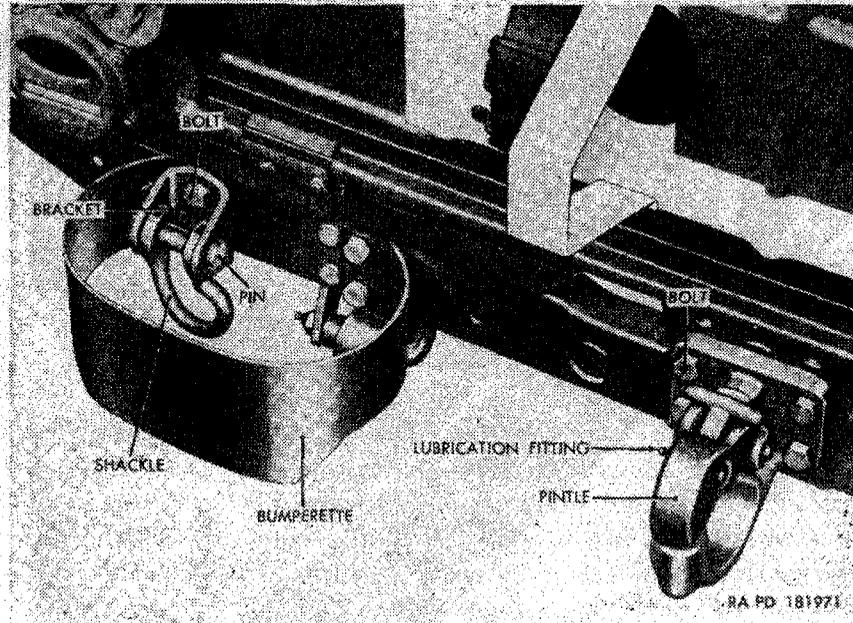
Left rear lifting shackle, bumperette, and towing pintle—installed.
